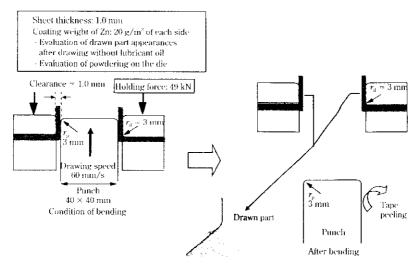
Appearance of formed part and powdering resistance after 90° bending test
